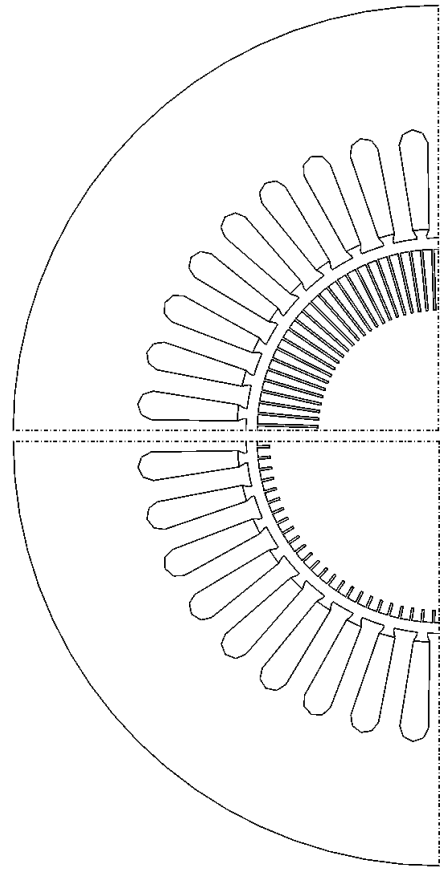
Initial (left) and optimized (right) designs of the grooved rotor.
